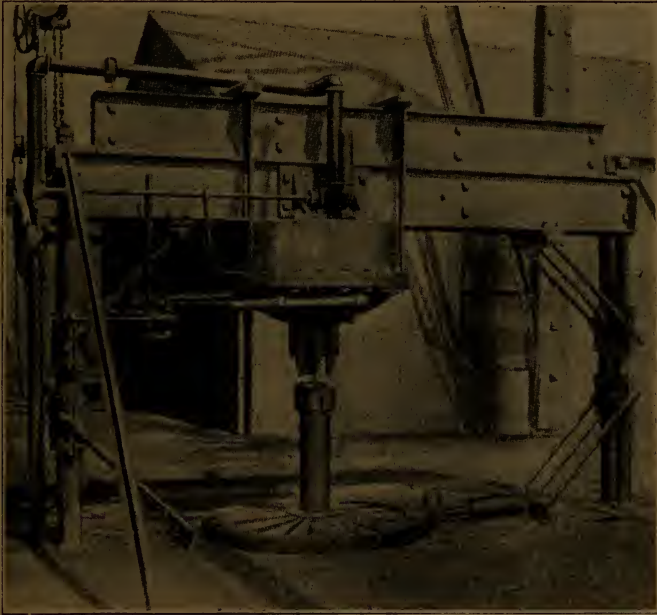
PUNCH FOR LARGE BOILER SHEETS.
